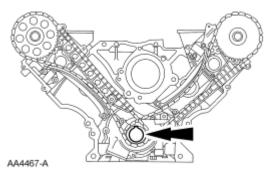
Crankshaft With Keyway At 12 O'clock Position Courtesy of FORD MOTOR CO.
